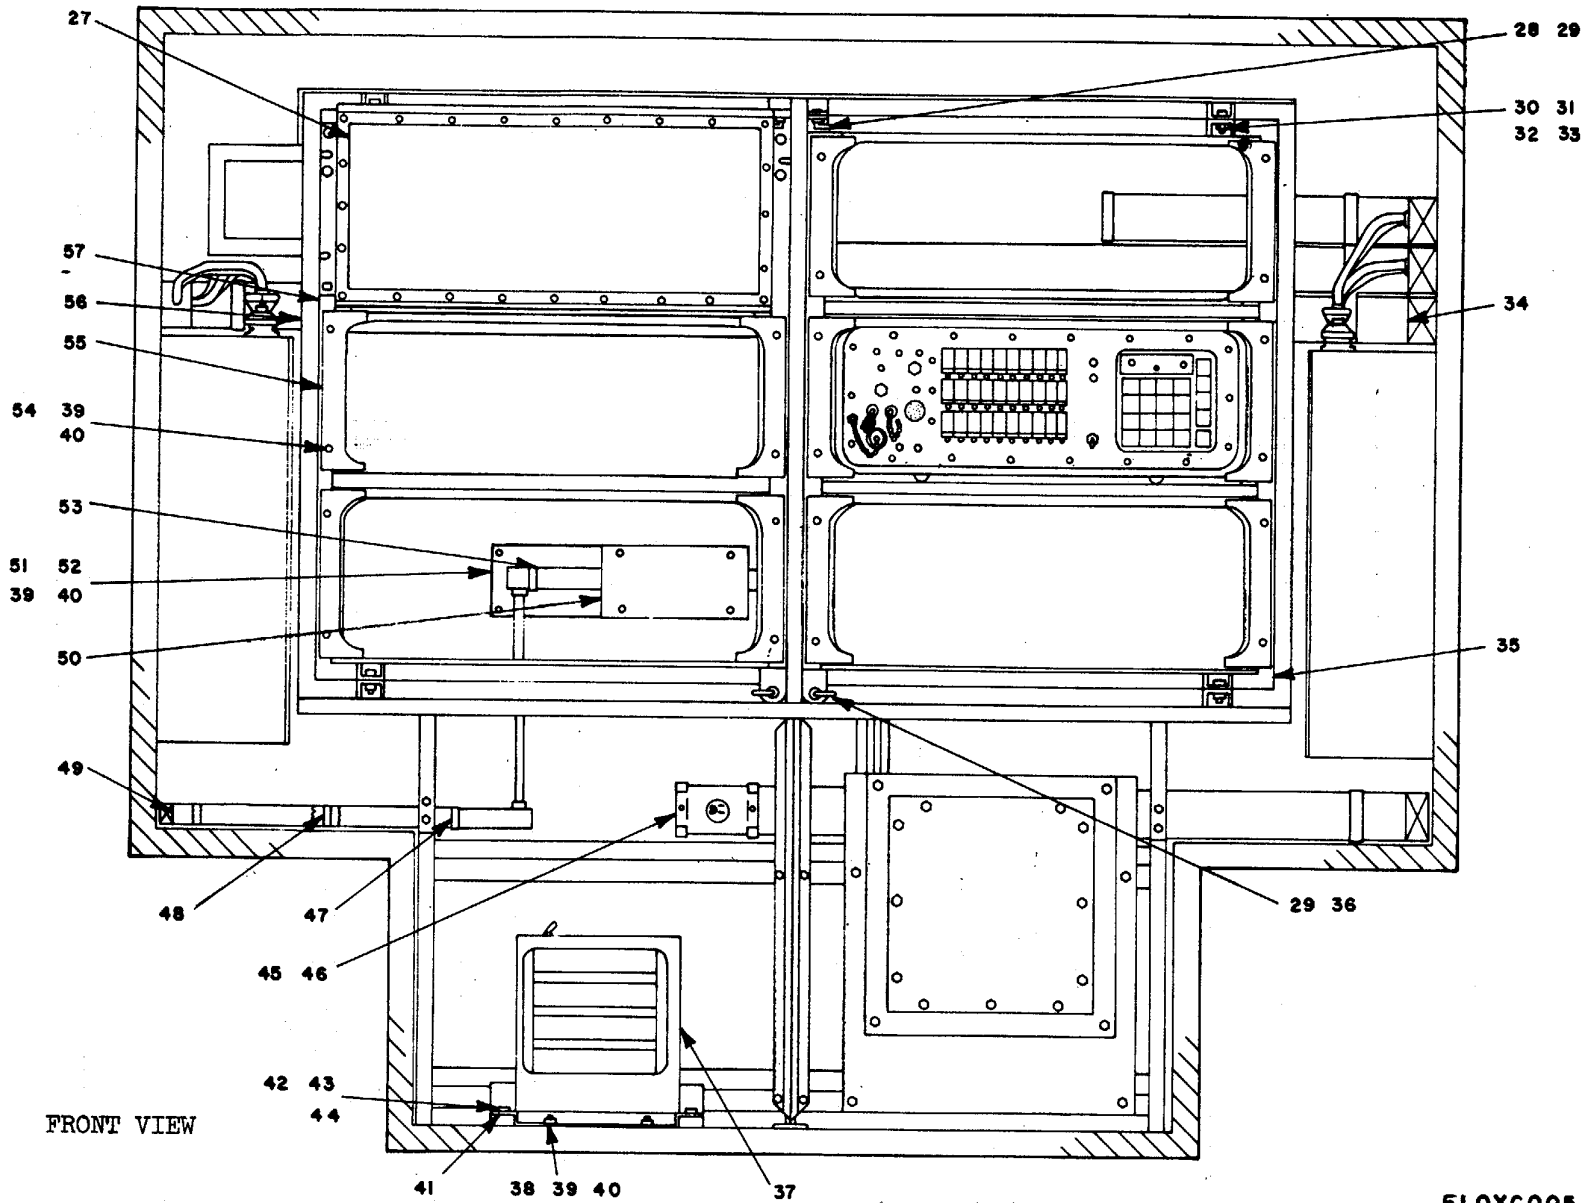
Shelter Electrical Equipment S-561/TTC-41(V) (Sheet 2 of 7)
